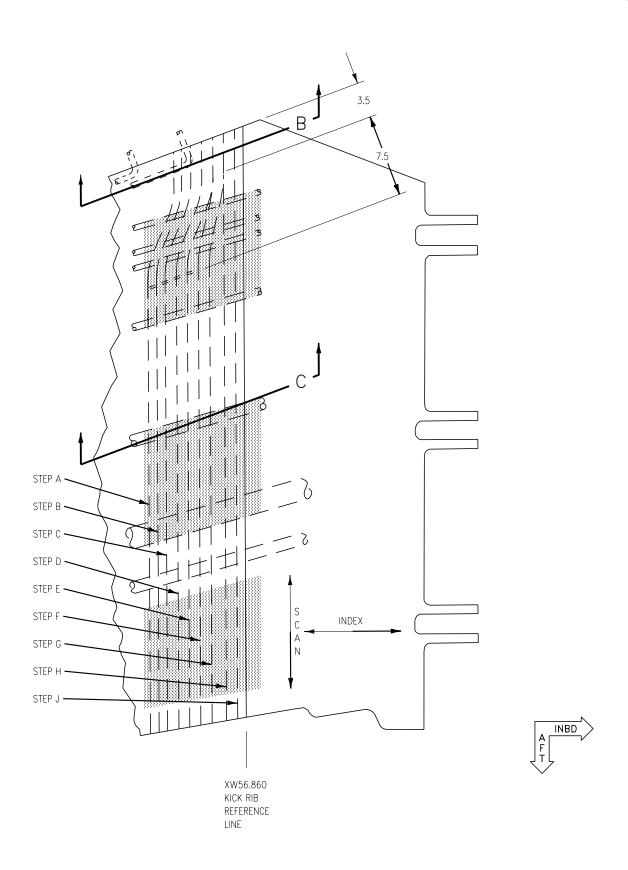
Inner Wing Upper Surface Titanium Splice Fitting Inspection Areas (Sheet 3)
